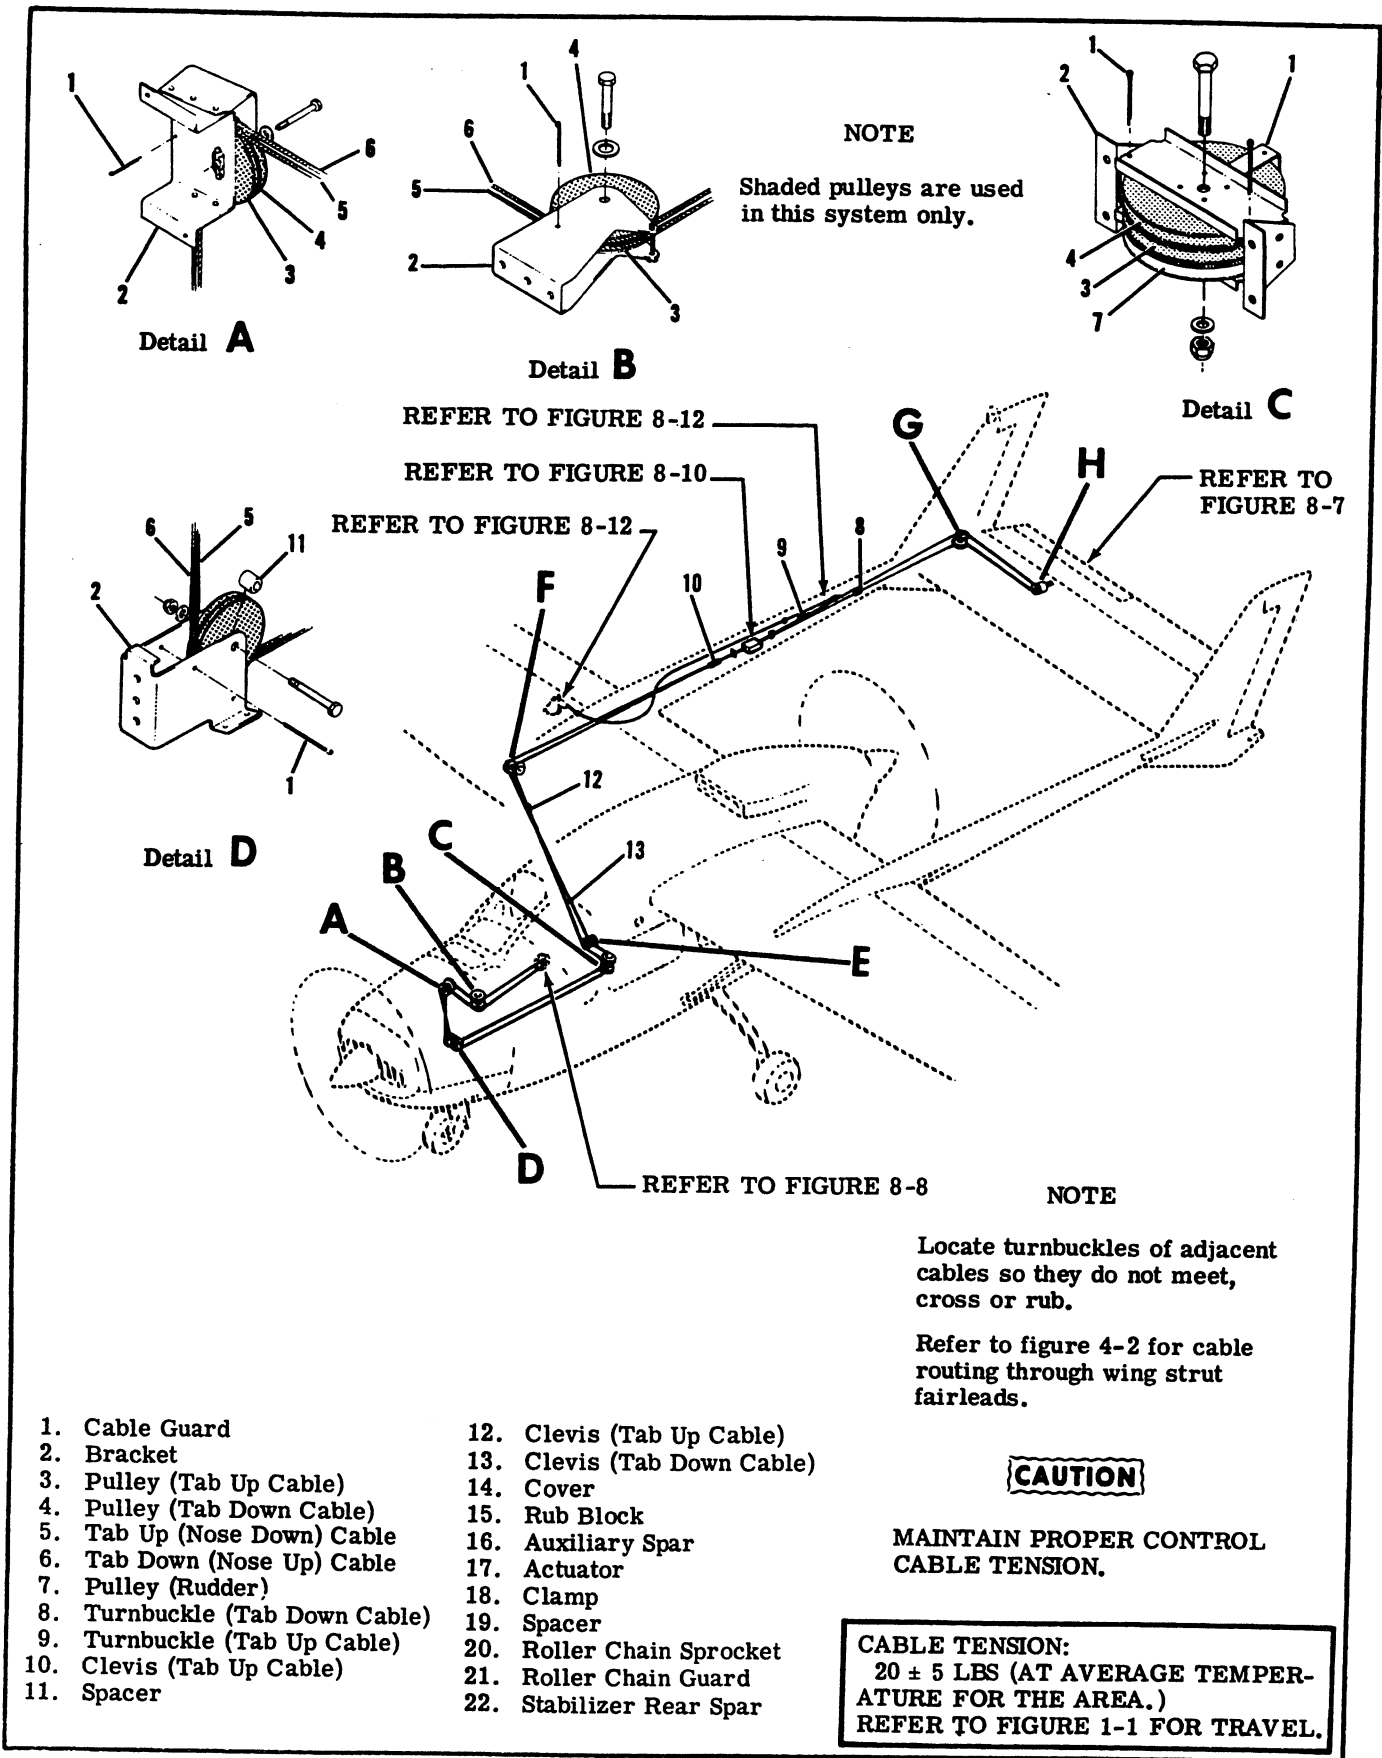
Elevator Trim Tab Control System (Sheet 1 of 2)
